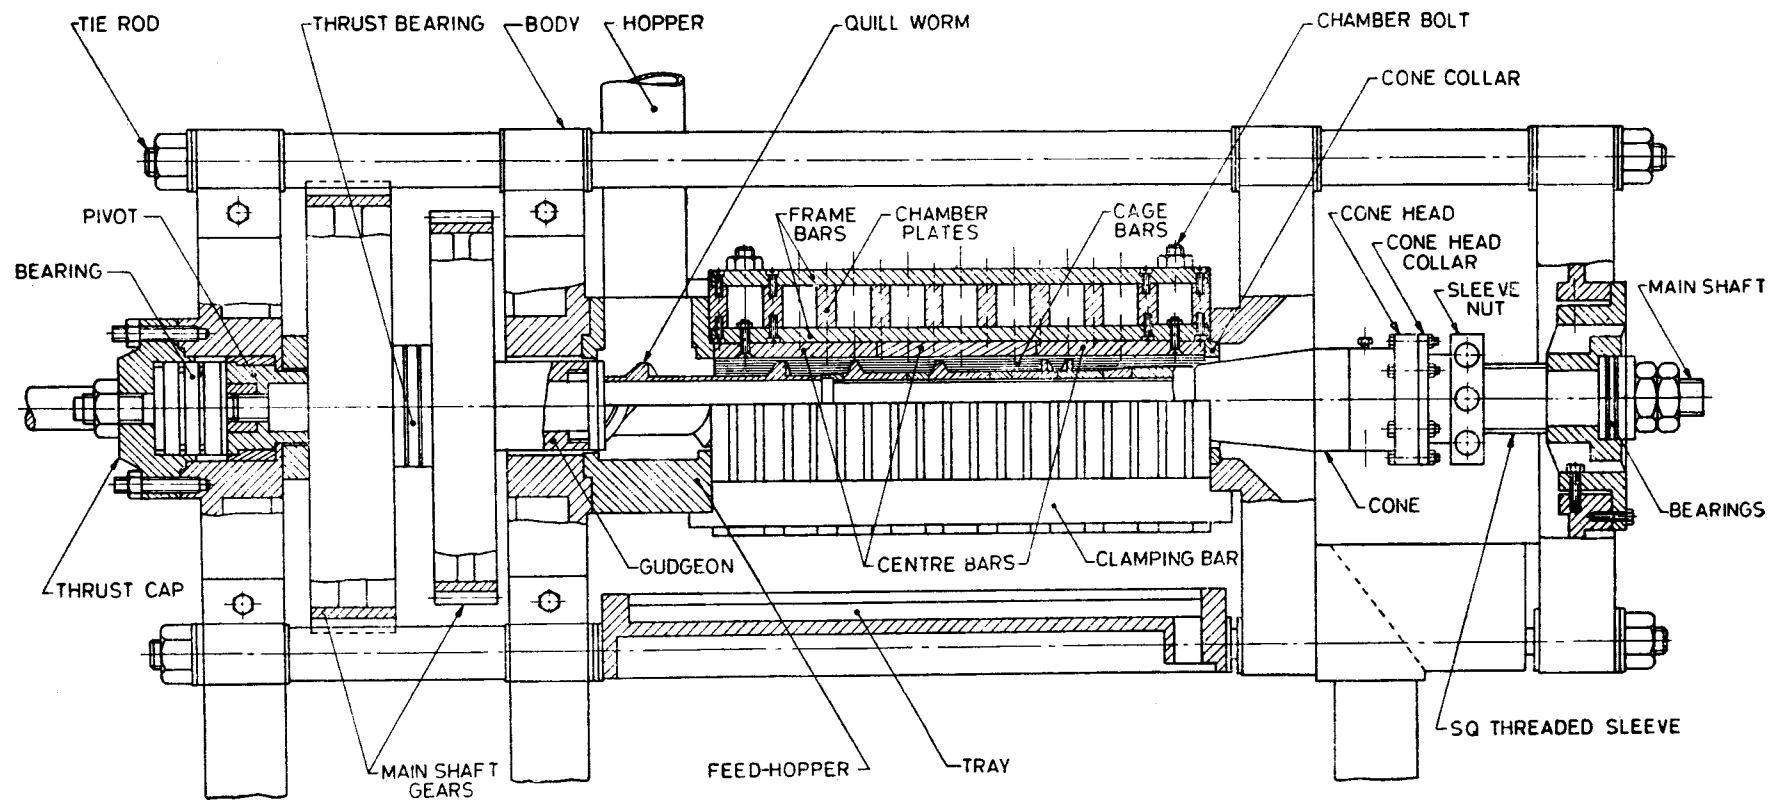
NOMENCLATURE AND ASSEMBLY OF DOUBLE GEAR OIL EXPELLER
